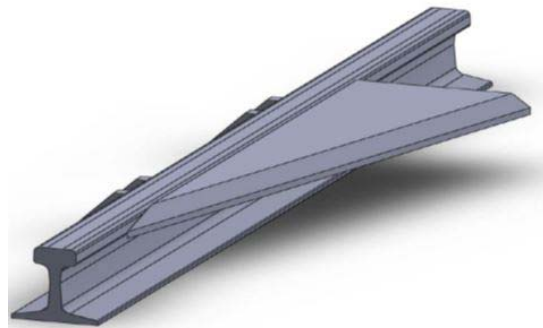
CAD Drawing of Flange Bearing Plate Design
